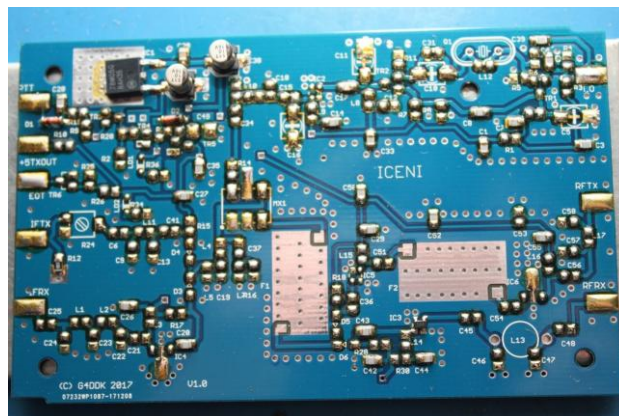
Partially populated test board using solder paste and template followed by reflow soldering. Shows promise for the future with assembled boards
